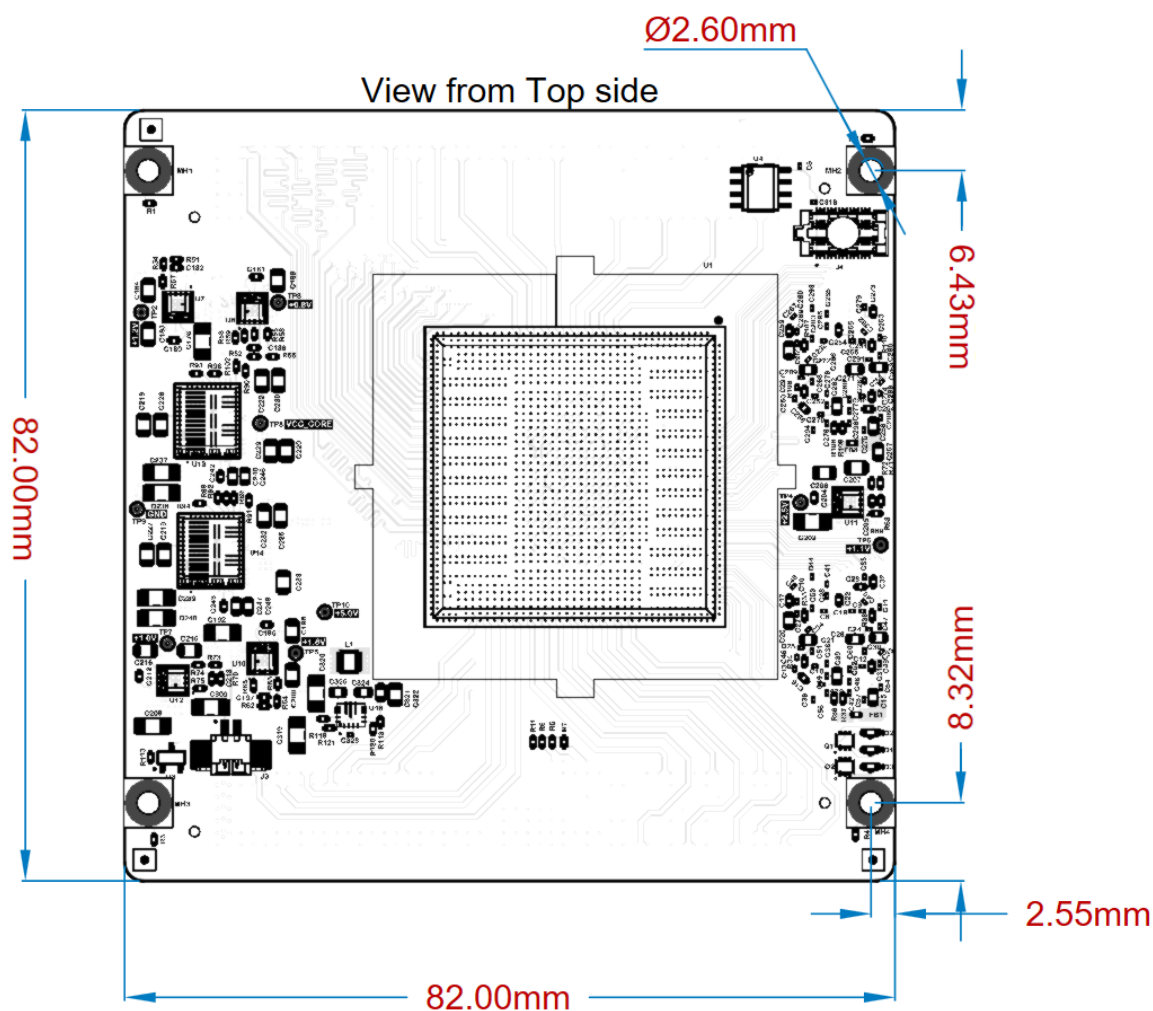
MitySOM-A5E Mechanical Outline, View from Top
